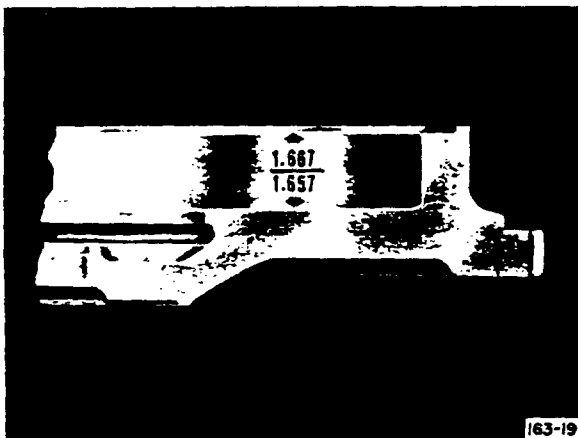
Flywheel Rubbing Surface-to-Clutch Cover Bolting Surface Dimension
